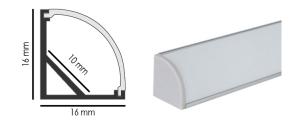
Suggested 90° corner aluminium Profile LED Strip be used. Manufacturer: Havit Lighting
